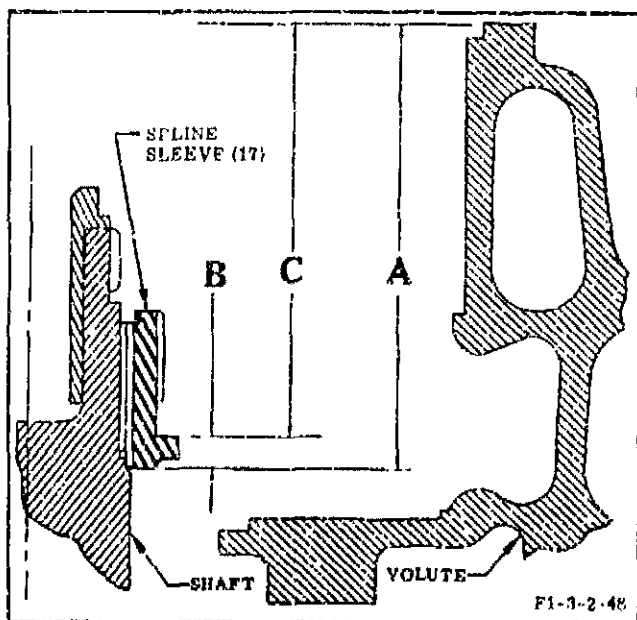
Checking Oxidizer Spline Sleeve Installation
